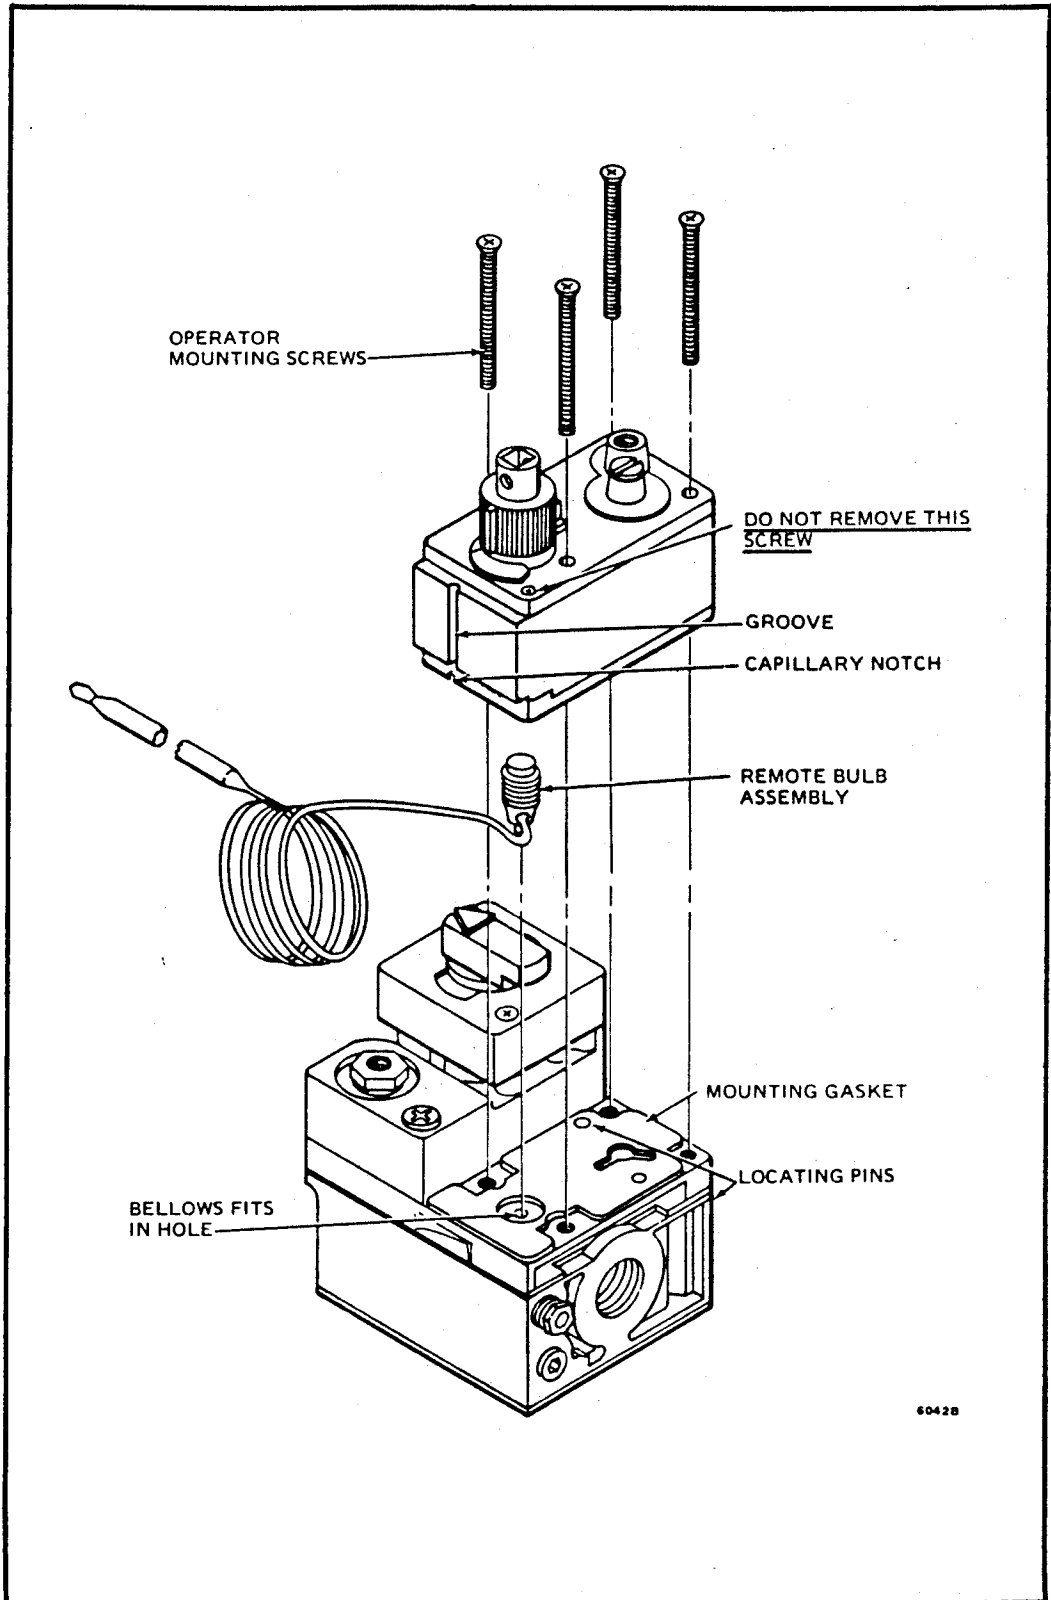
Installing operator, bulb and bellows assembly on V500 control.
